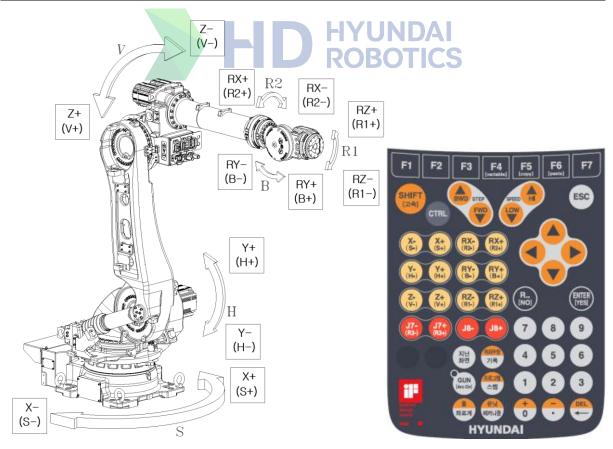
External Appearance of the Manipulator and the Operation Axes
